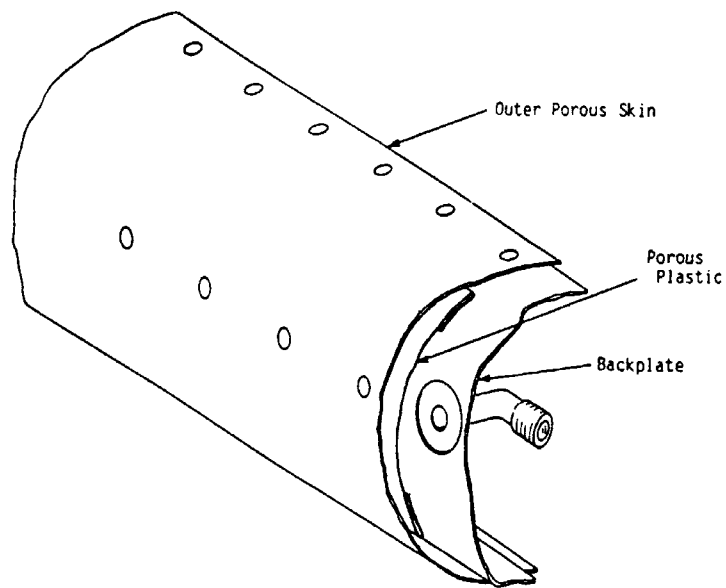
CONSTRUCTION OF A TYPICAL POROUS PANEL
